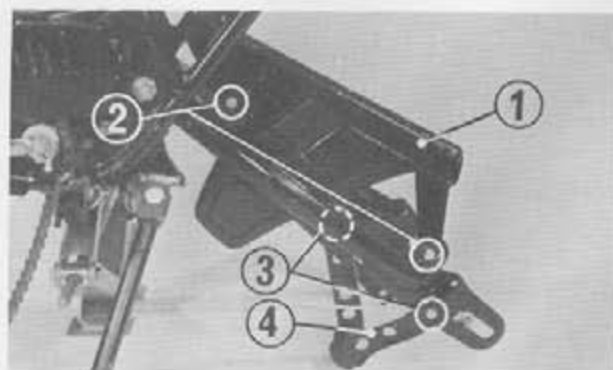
(1) Drive chain case (2) 6 mm bolts (3) 6 mm bolts (4) Chainguide
